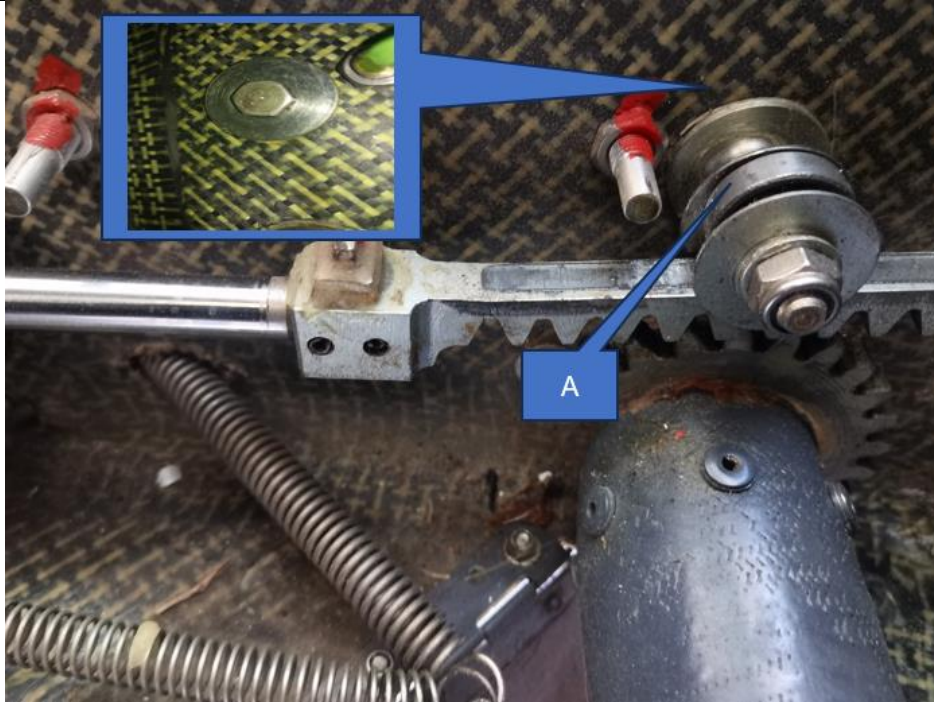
The collapsed bearing (A) which caused the gears to skip tracks when retracting. The inset picture shows damage to the head of the bolt securing the bearing.
